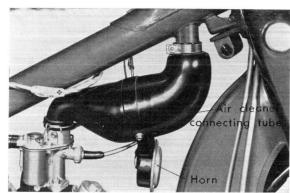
Air cleaner connecting tube (C50, C50M, C65, C65M)
